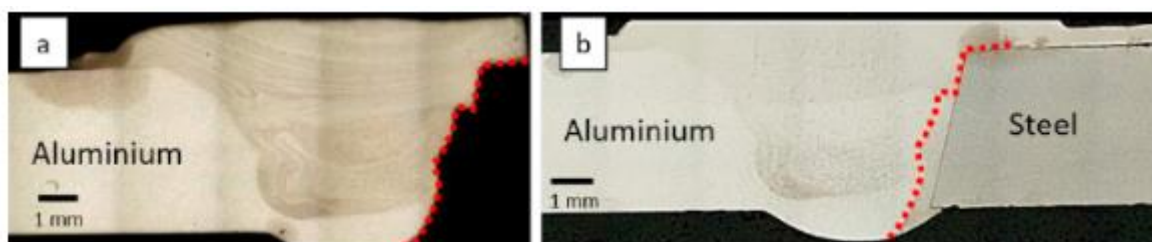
Images of the weld with a red dotted line indicating the fracture path shown on (a) a broken tensile specimen (b) an intact tensile specimen. Showing how most of the fracture occurs in the aluminium (Berto et al. 2018)
